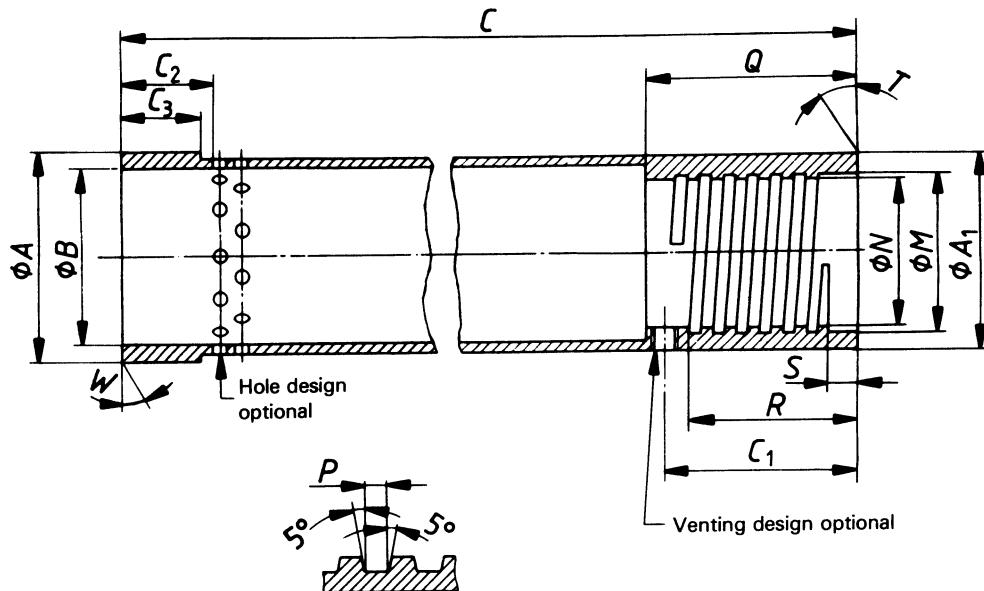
“WG” design double-tube core barrel — Inner tube (see Table 34)
